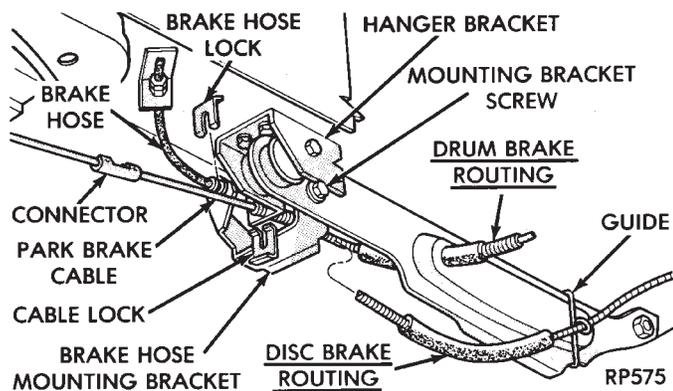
Remove Brake Hose Mounting Bracket Screw and Park Brake Cable
